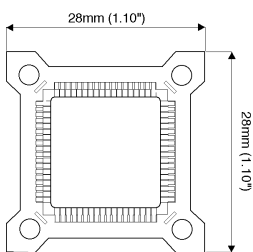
120 pin QFP Socket Adapter Dimensions for HP E3471B (HP P/N E3471-61620)
